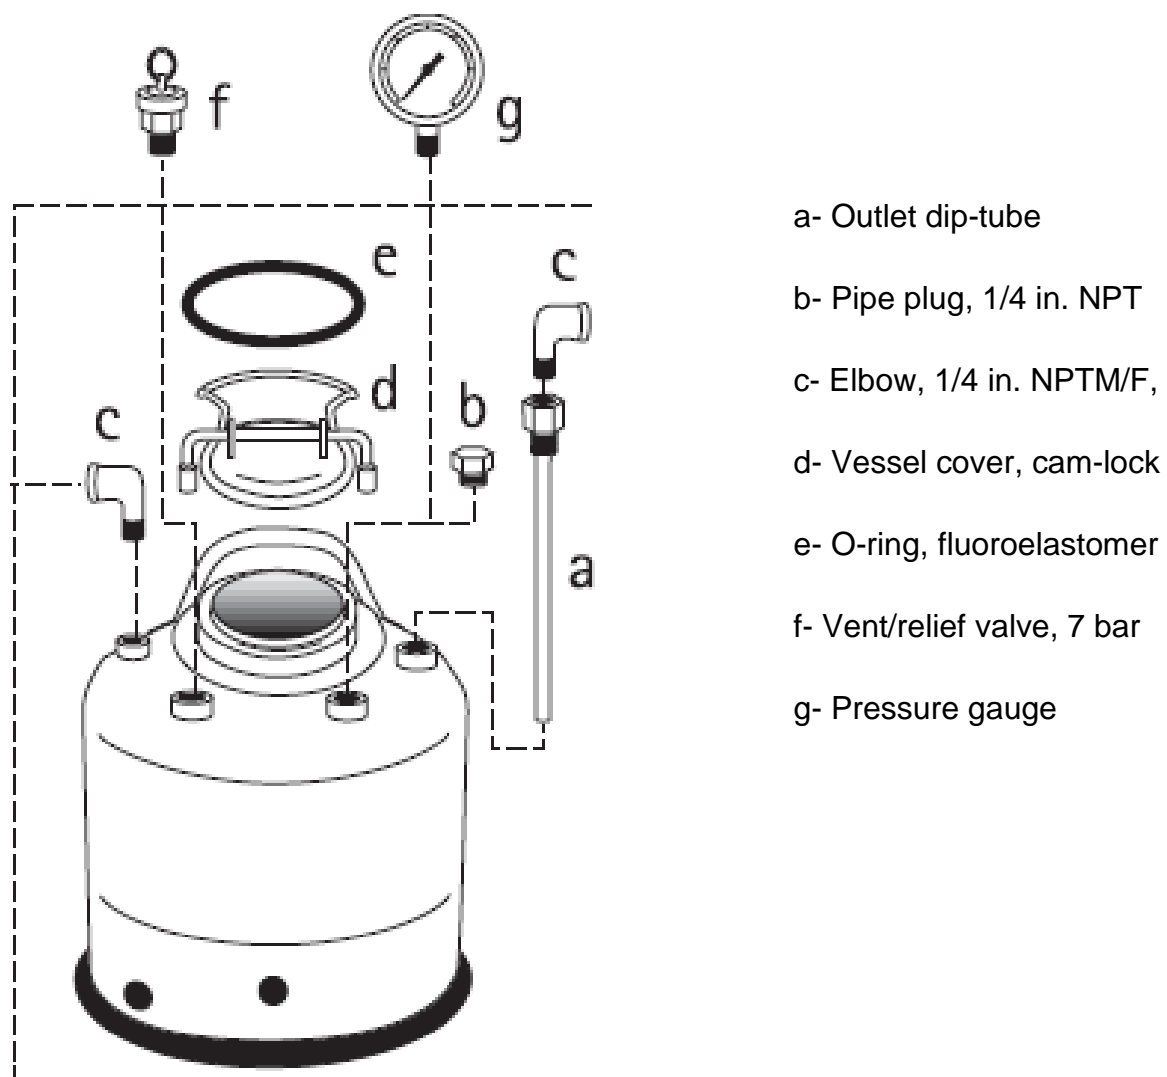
Manufacturer components and fittings Integrated with the pressure vessel.
